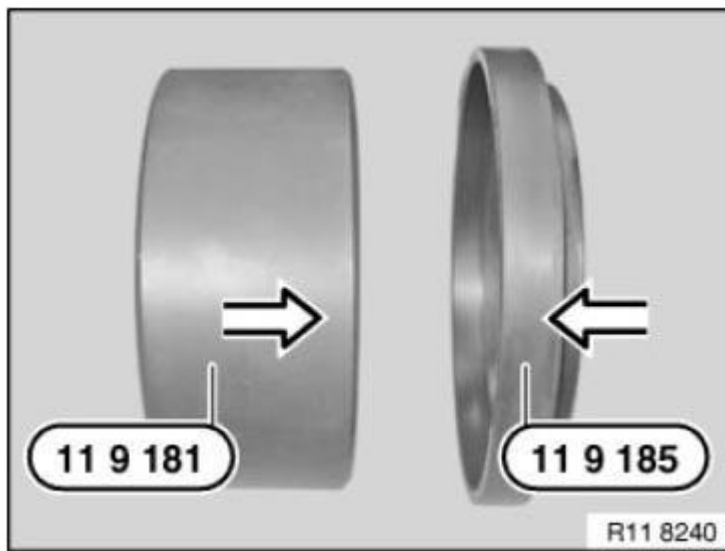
Connecting Special Tool 11 9 185 Onto Special Tool 11 8 181
